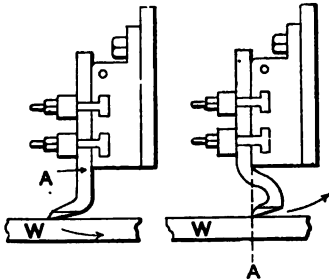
Cause of Planer Tools Springing into the Work, and Means for avoiding this.
